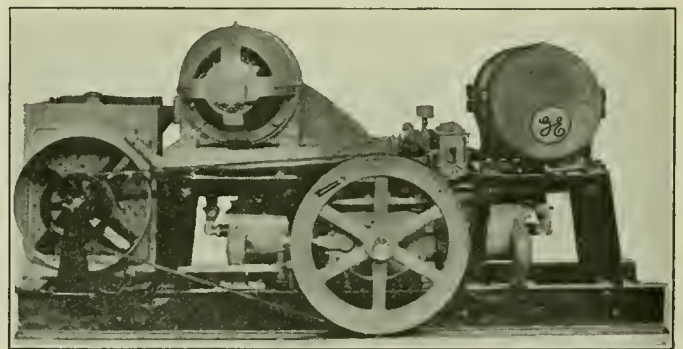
Heavy Duty, Arc Welding Set, Driven by 20-Hp., Two-Cylinder Kerosene Engine
